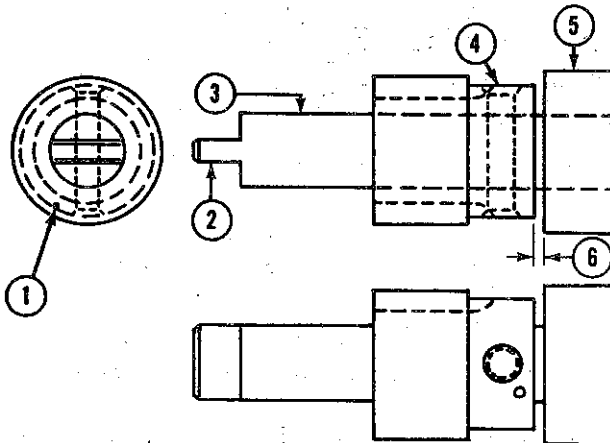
LOCATING CAMSHAFT GEAR ON OIL PUMP SHAFT
